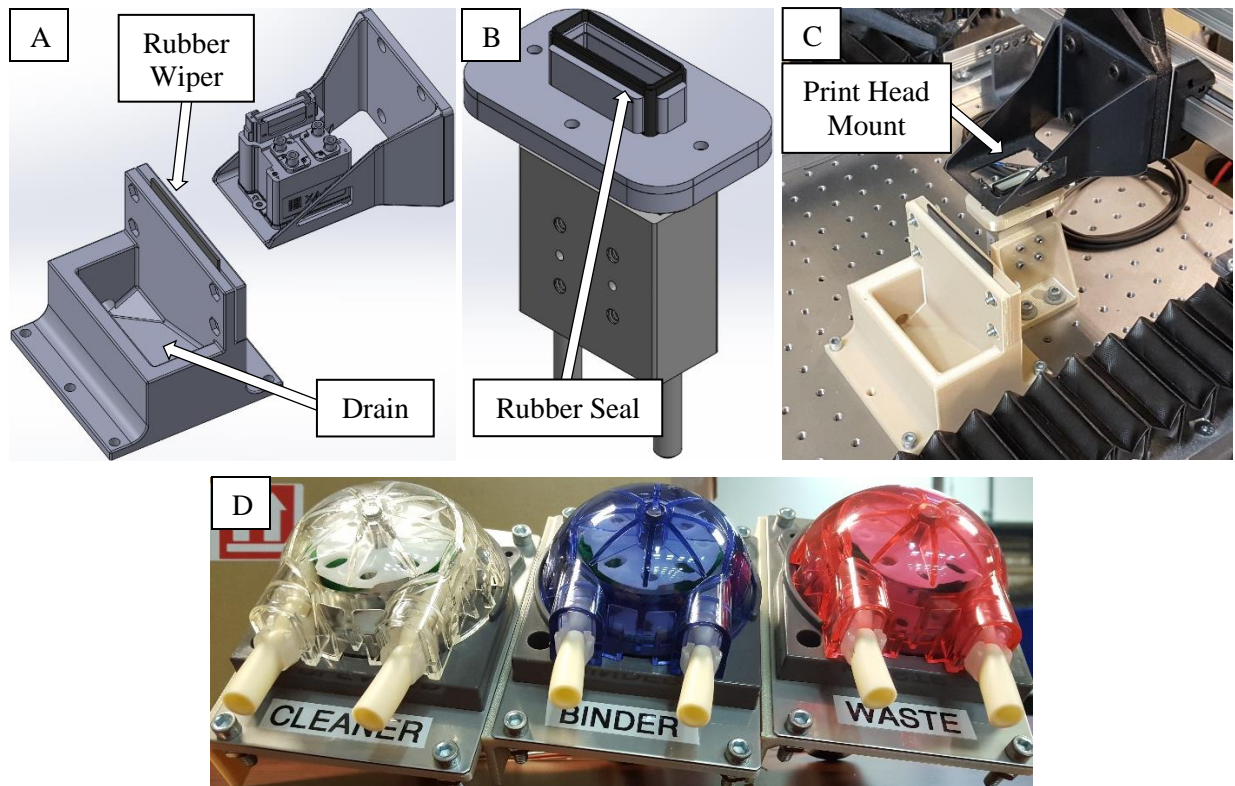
CAD model design of the wiping station with drain (A) and capping station with rubber seal to seal around print head nozzles (B); actual installation (C) and peristaltic pumps (D) for fluids that would connect to the print head and wiping station.
